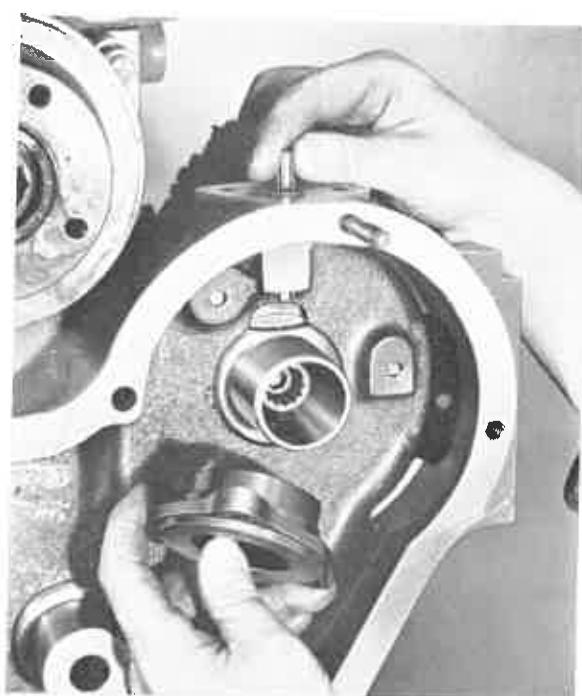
Removing Fuel Pump Drive Gear Hub.
